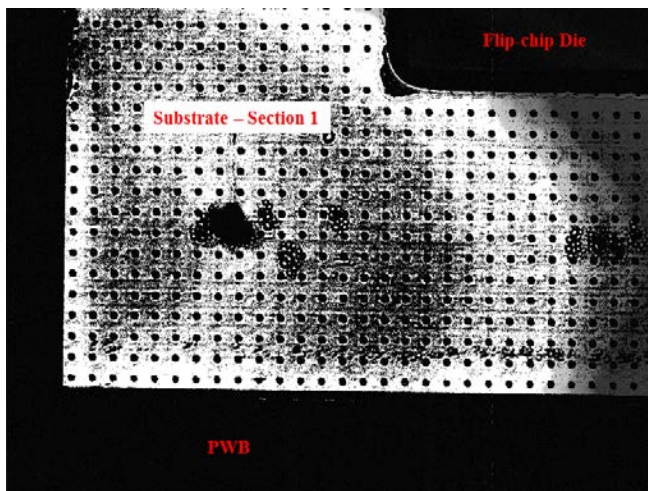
Partial pad cratering in the solder ball BJ1 in board # 41
